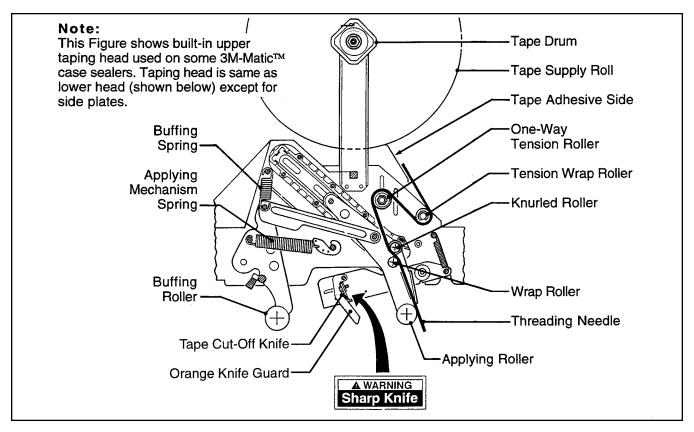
Taping Head Components/Threading Diagram – Upper Head (Left Side View)
